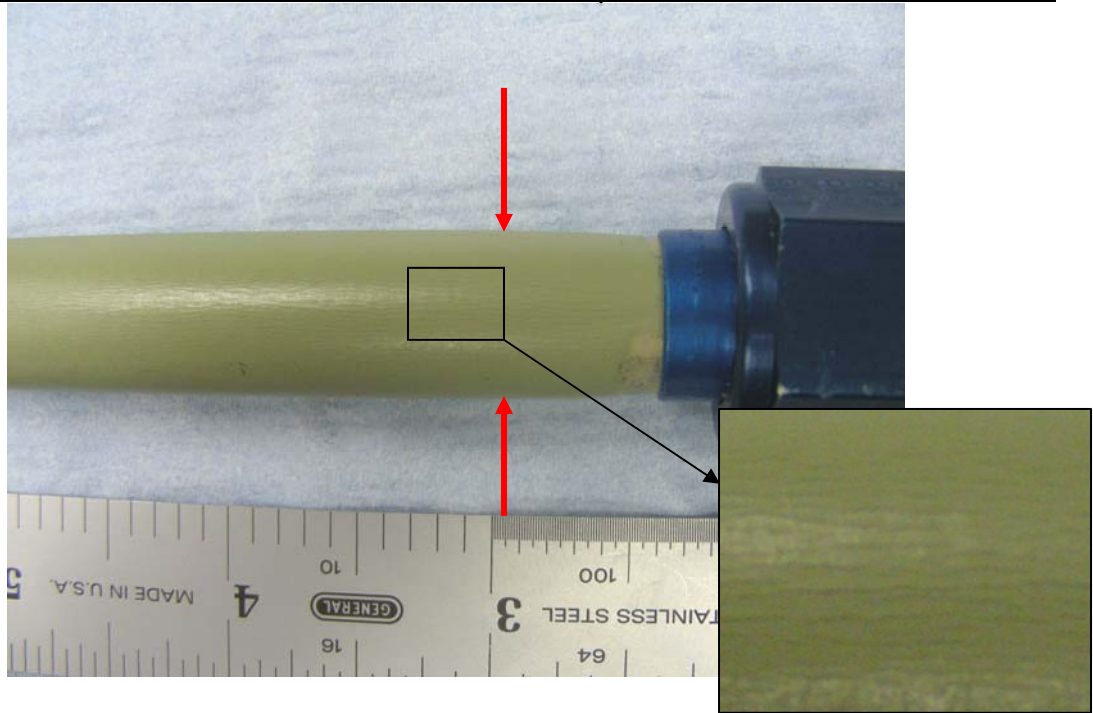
Close-up view of the tube near the aluminum sleeve, showing enlargement of the tube OD (red arrows) and longitudinal cracking of the primer (inset), indicative of excessive internal pressure.
